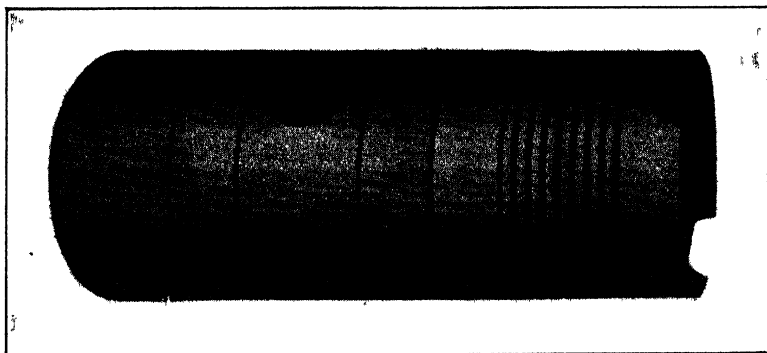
Working Cylinder and Cylinder Head, McIntosh and Seymour Engine
